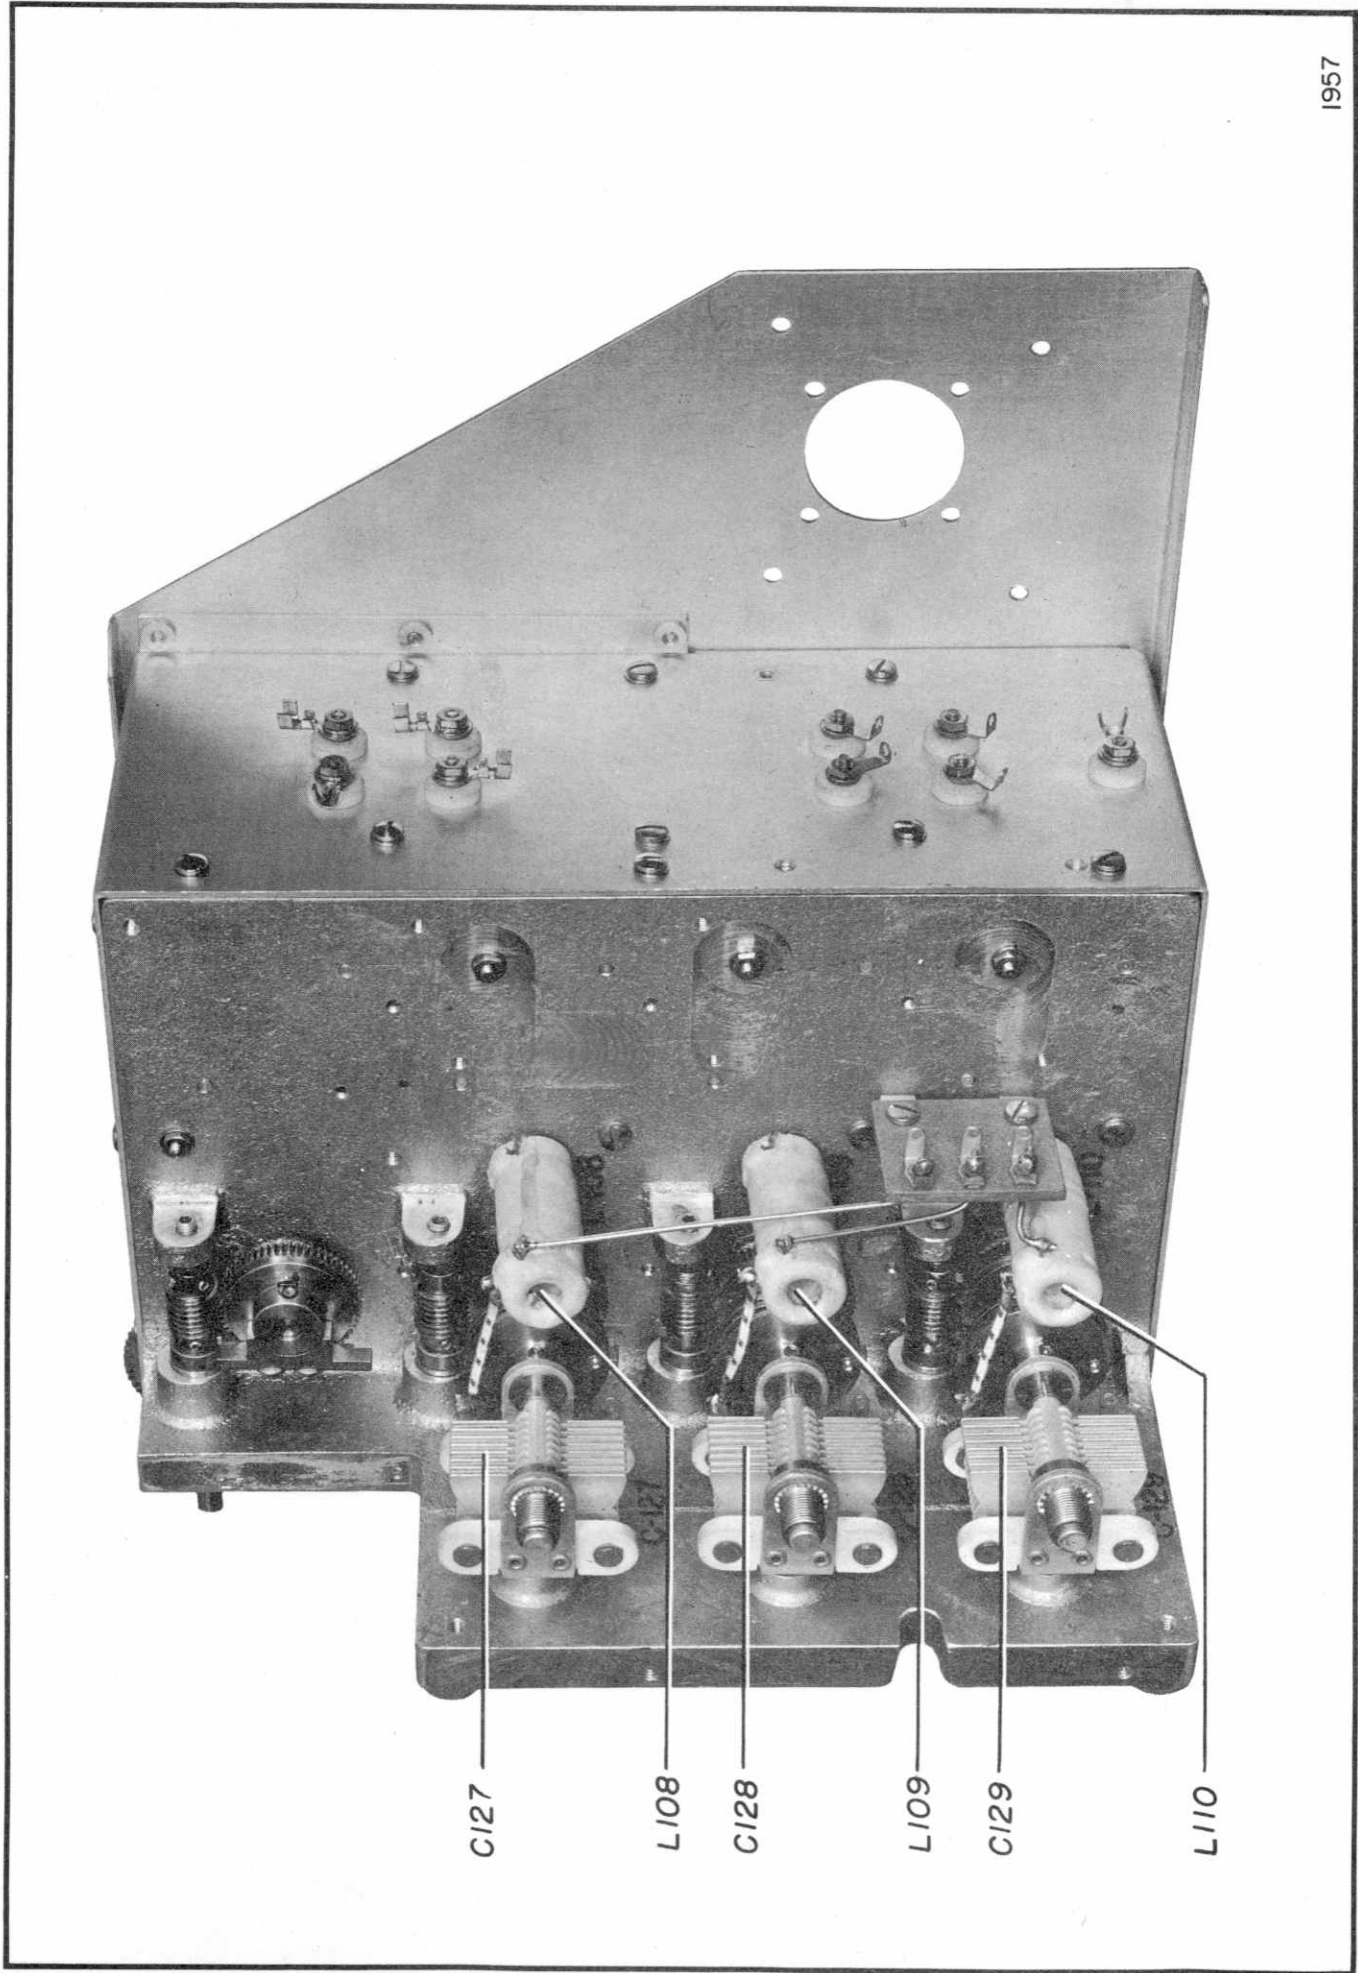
RIGHT SIDE VIEW OSCILLATOR ASSEMBLY
